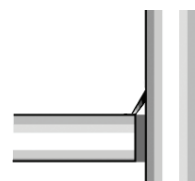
3/32 inch (2.5mm) gap after welding
